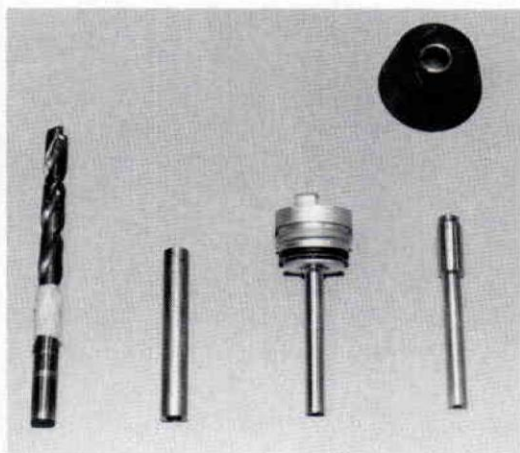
Tooling. Bottom row from left to right, 23/64" drill, steel tube or ferrule, modified valve body with pin for positioning valve housing, loose pin for positioning rubber laminating dummy (top row).
